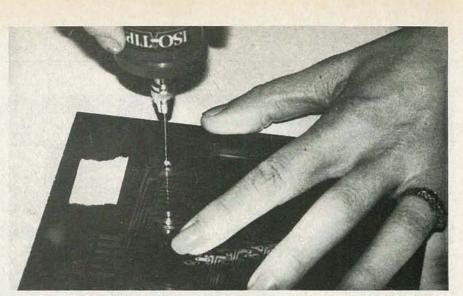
IF THE BOARD IS DOUBLE SIDED, tape one of the negatives to the board and drill out four of the feedthrough holes. Those holes will be used later to make sure that the two sides of the board are in register.
